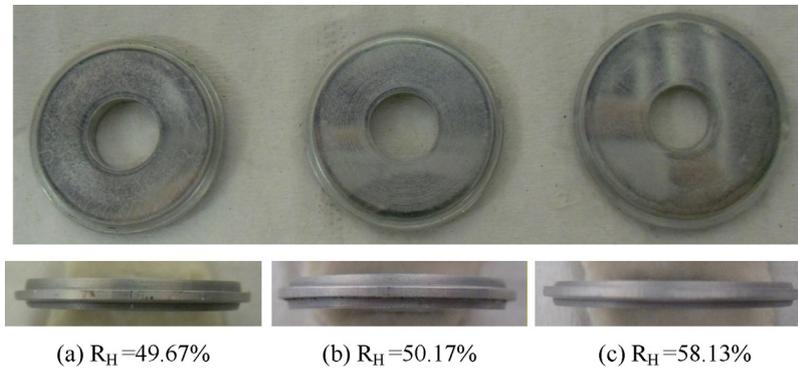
The ring workpiece with outer boss after compression under the dry dies.
